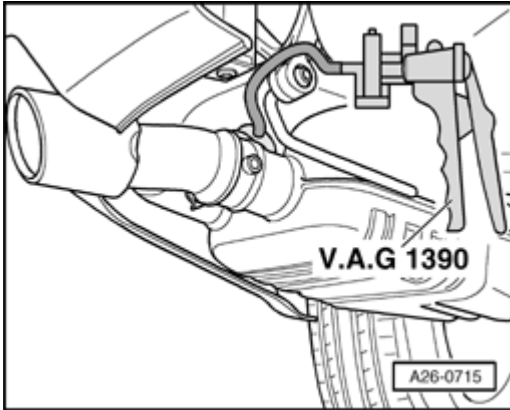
Connecting Hand Vacuum Pump V.A.G 1390 To Vacuum Diaphragm
